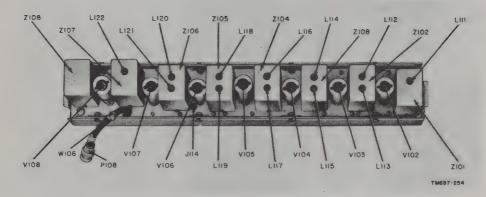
Receiver if. amplifier plug-in assembly, top view.
